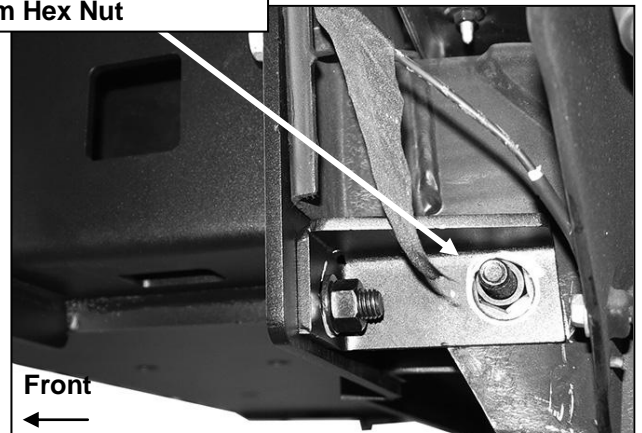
Attach inner and outer driver side Support Brackets to back of Winch Tray mounting Bracket
